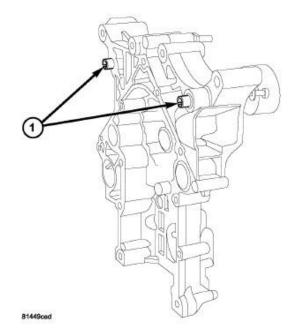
FRONT COVER SLIDE BUSHINGS Courtesy of CHRYSLER LLC
